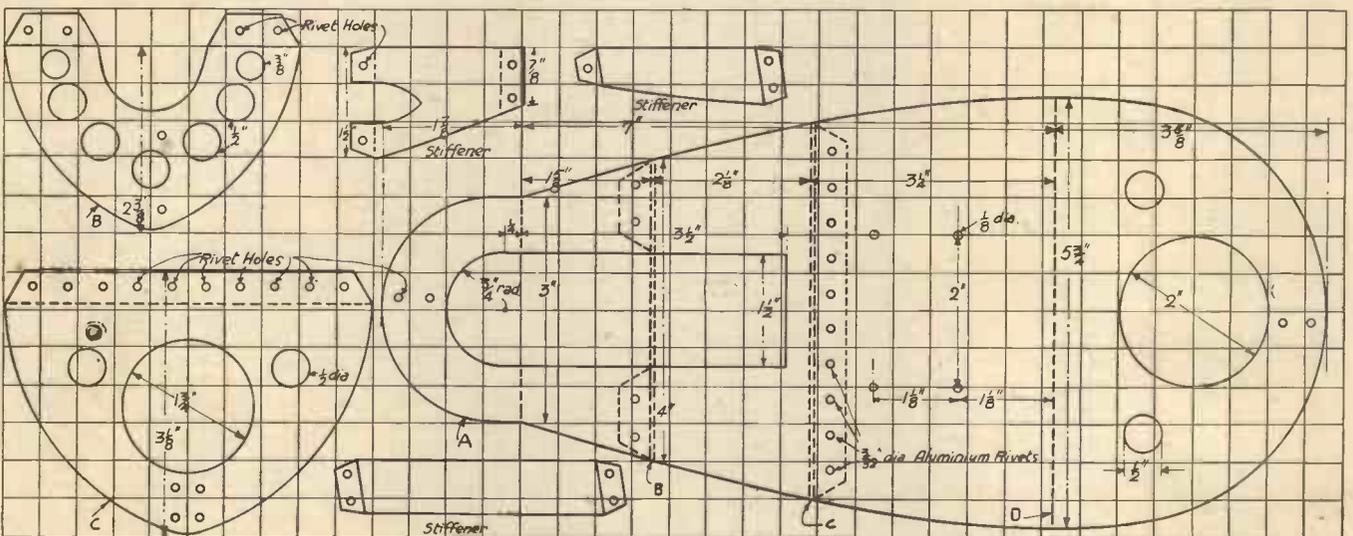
Detail drawing of the engine cradle. Copy this drawing on to the 18 gauge aluminium, making the squares of $\frac{1}{2}$ in. sides. The piece of aluminium measures 18 \times 7 in.
